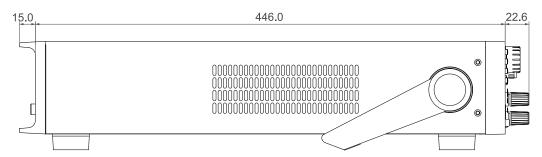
N3412/N3413 Series Master Chassis side Dimension(mm)
